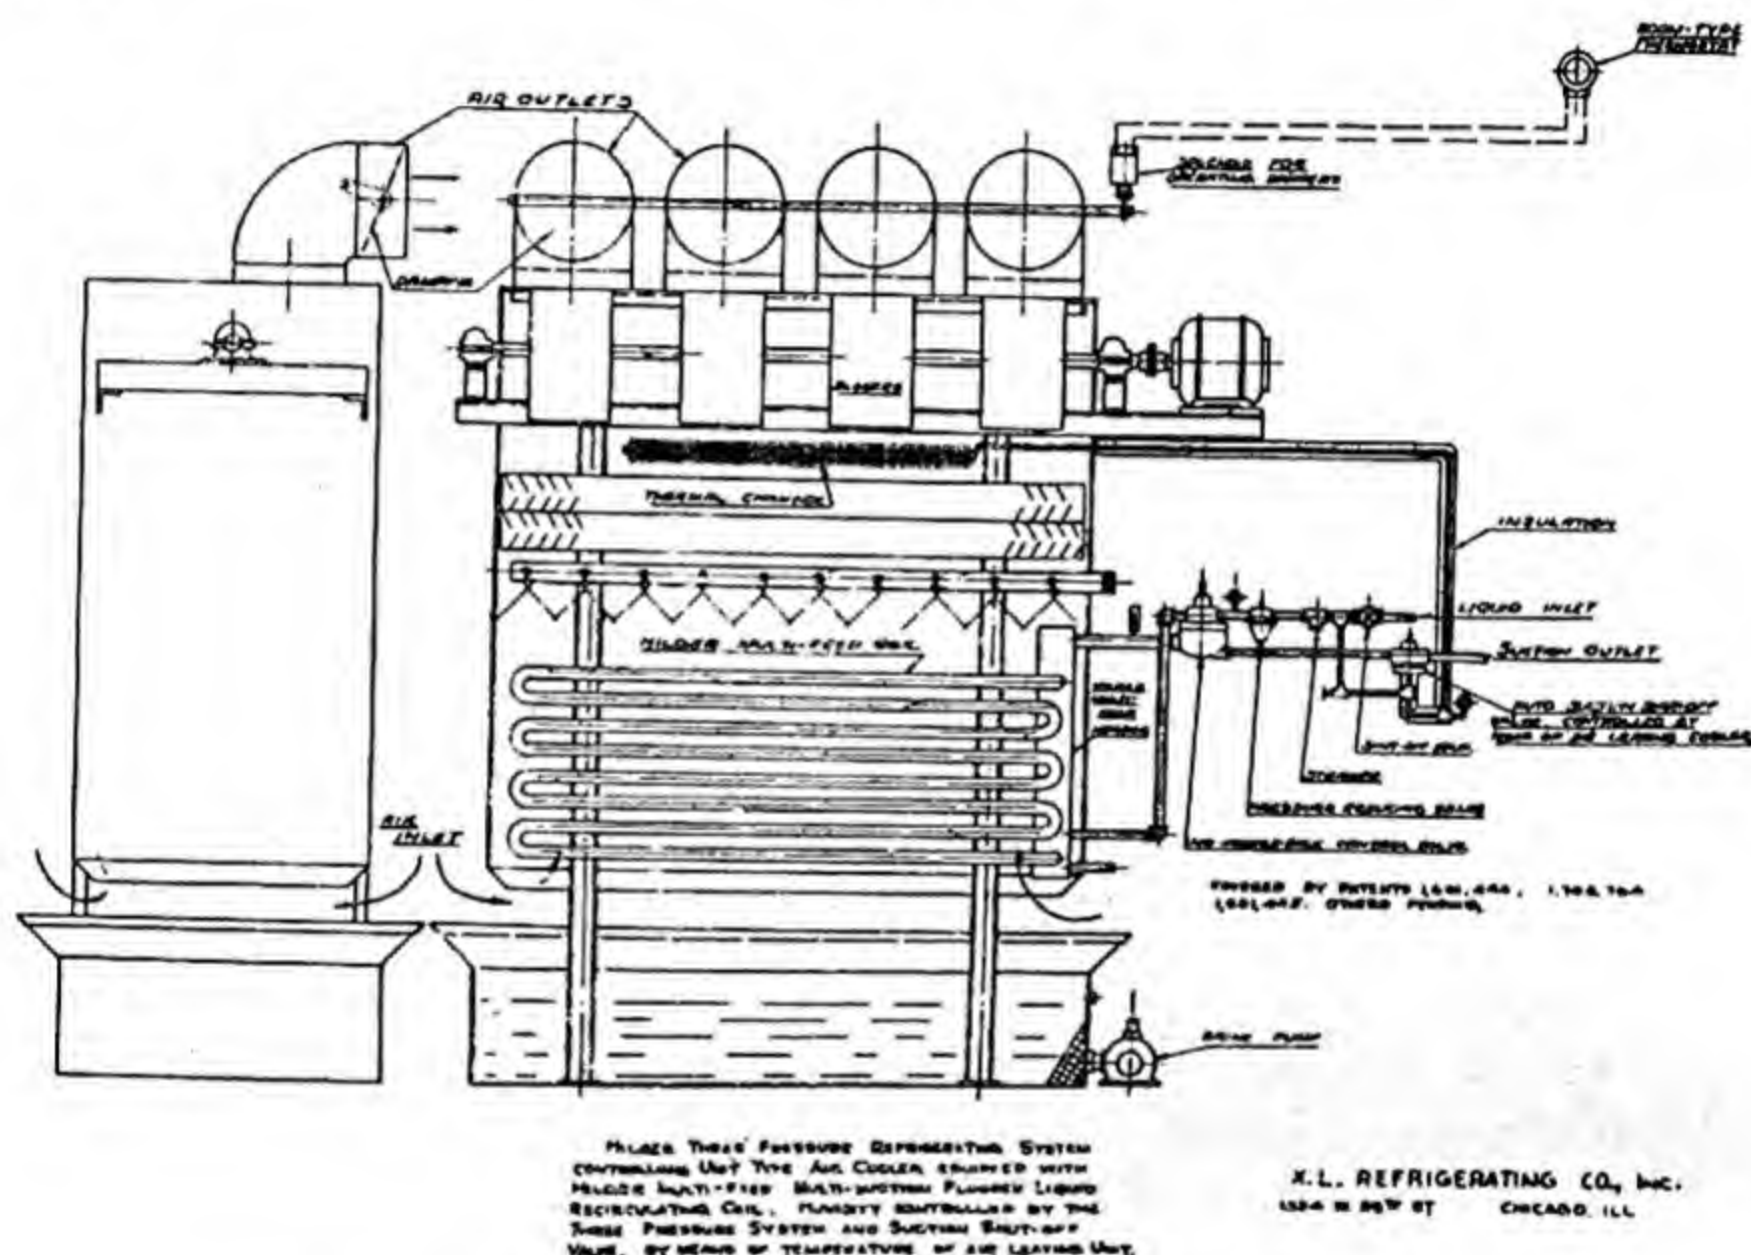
Hilger Unit Type Air Cooler and Conditioner.
